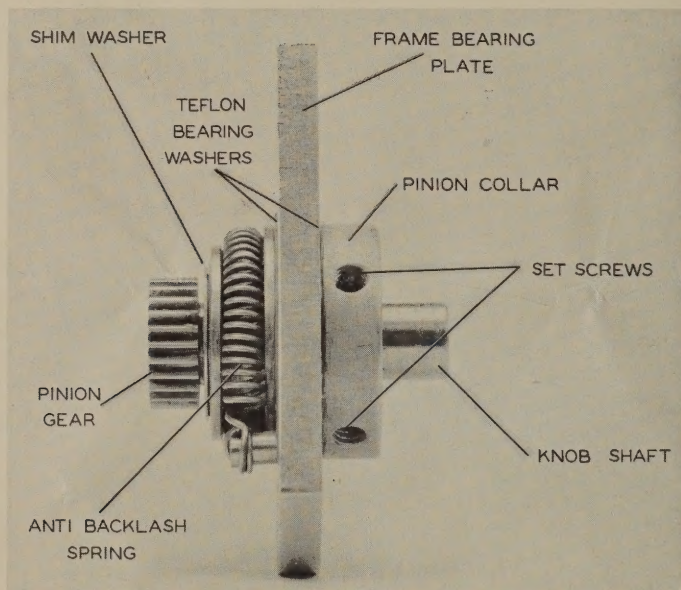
Vernier Mechanism, Right Side View C118-06-P
